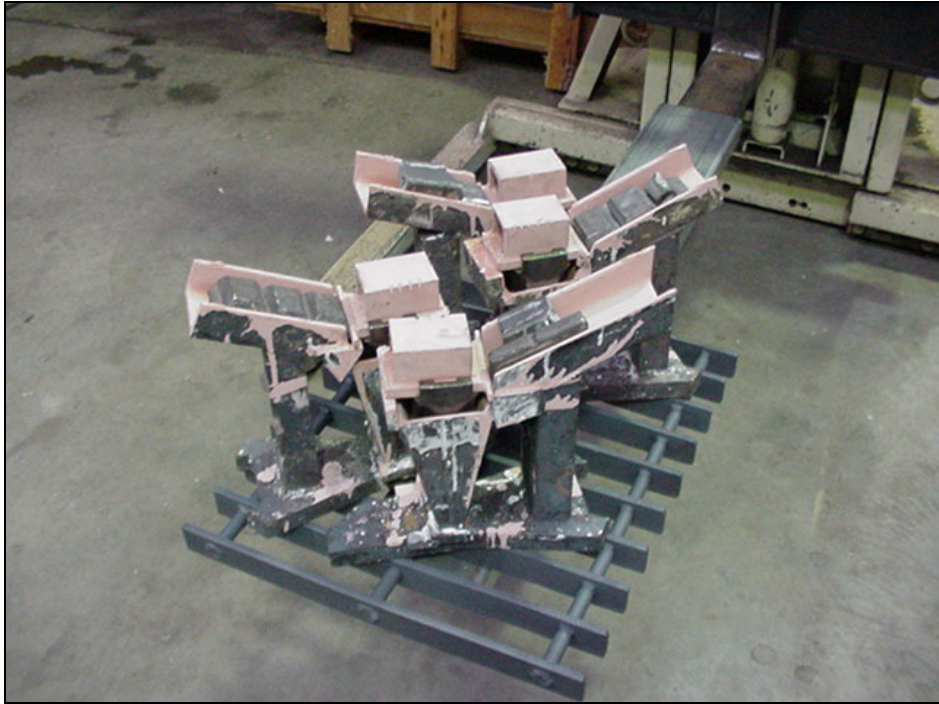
Steel moulds coated with refractory ceramic paint, with steel parts inserted and measured white iron charge positioned in side chutes.
